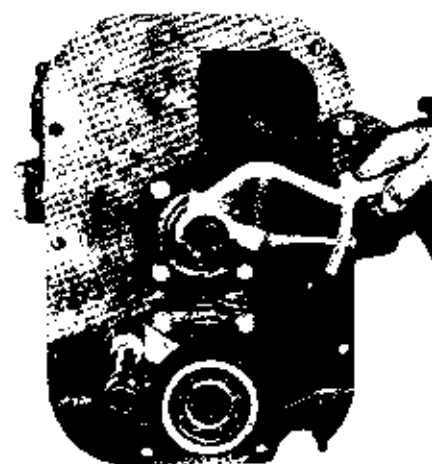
Desired adjustment of mainshaft bearings is 20-35 inch pounds torque to rotate the shaft.
